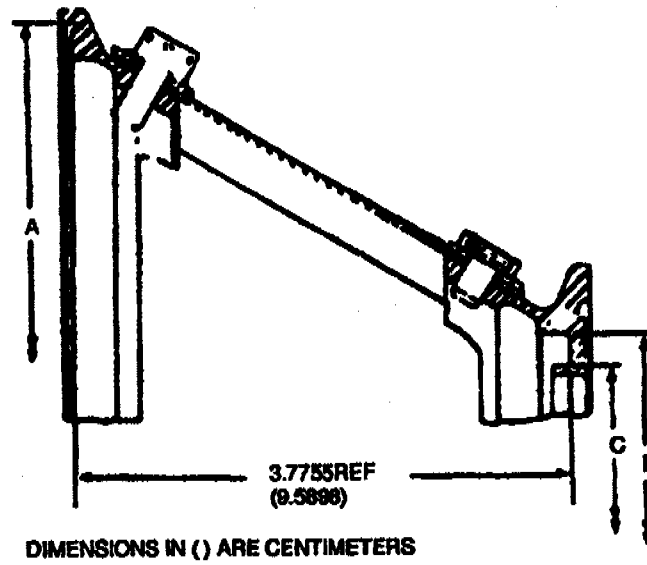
Diffuser Aft Support Cone Inspection Locations.
